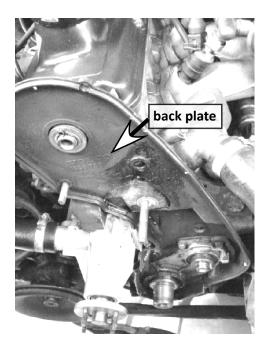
This photo shows all three shafts with the pulleys off. Pull off the back plate to expose the overhead camshaft seal.
